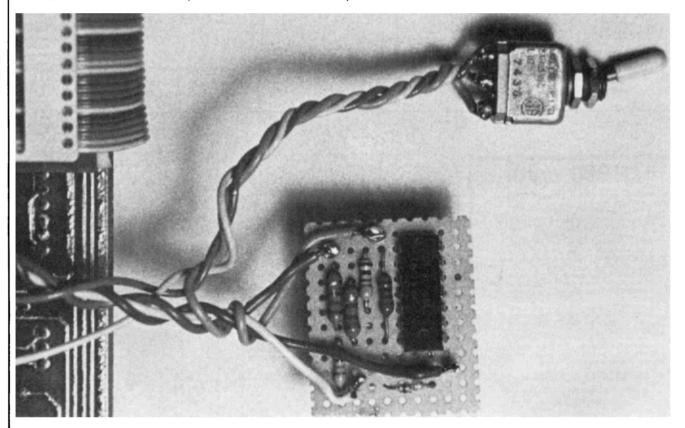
Cassette input board for speech input is assembled on a 1-inch-square piece of perforated board.
